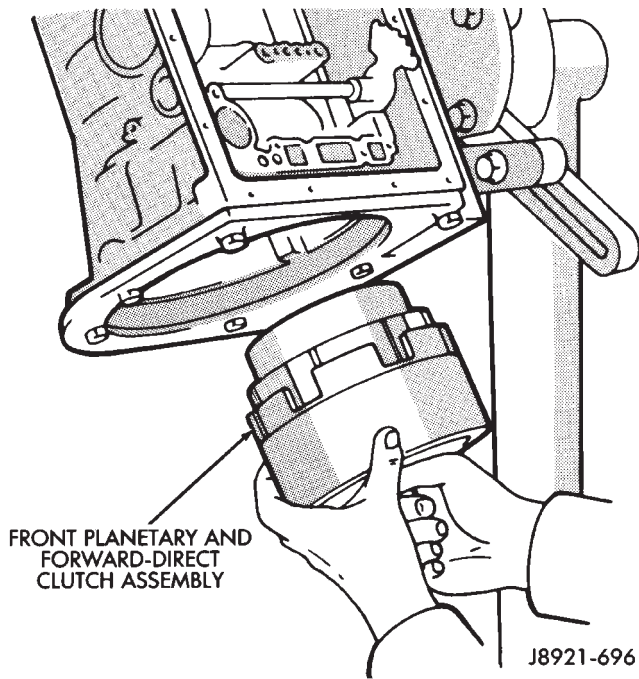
Installing Front Planetary And Forward-Direct Clutch Assembly
